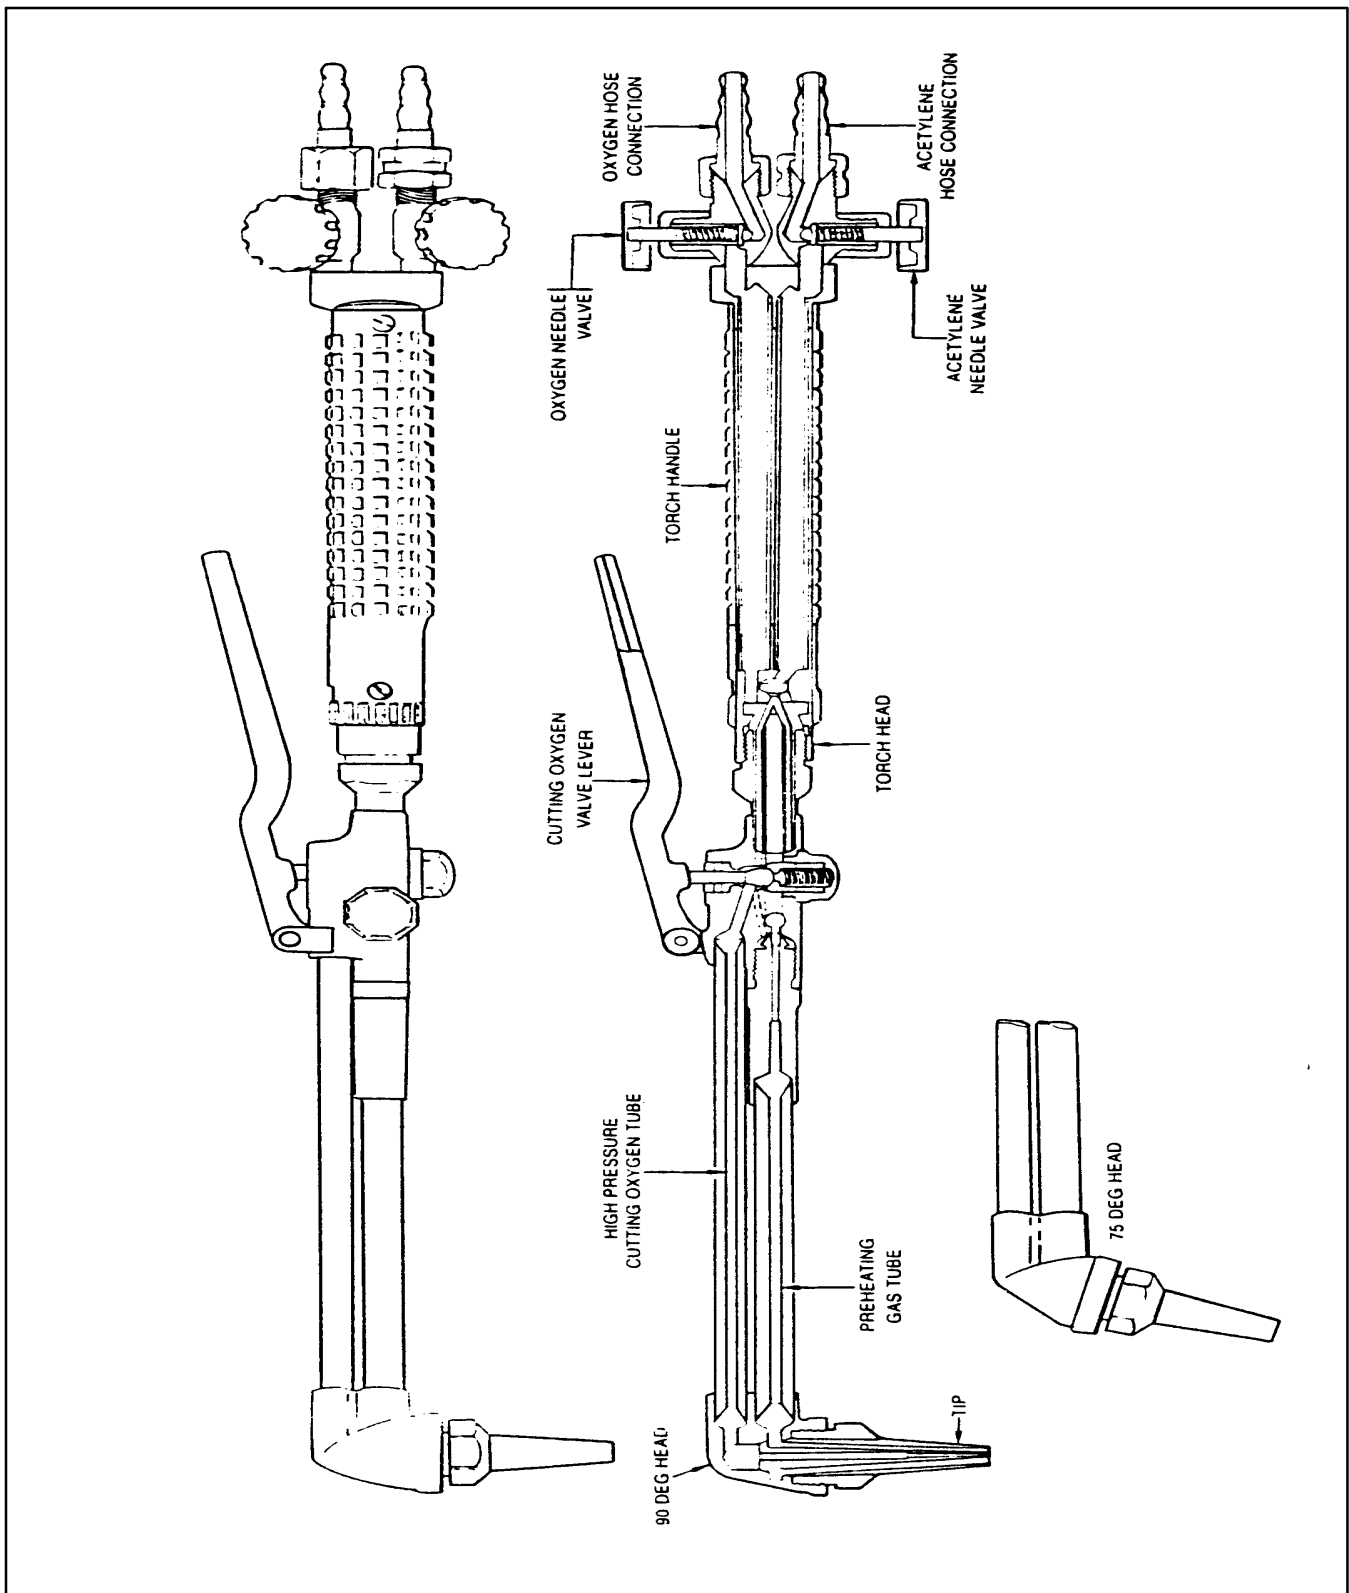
Cutting Attachment for Welding Torch
